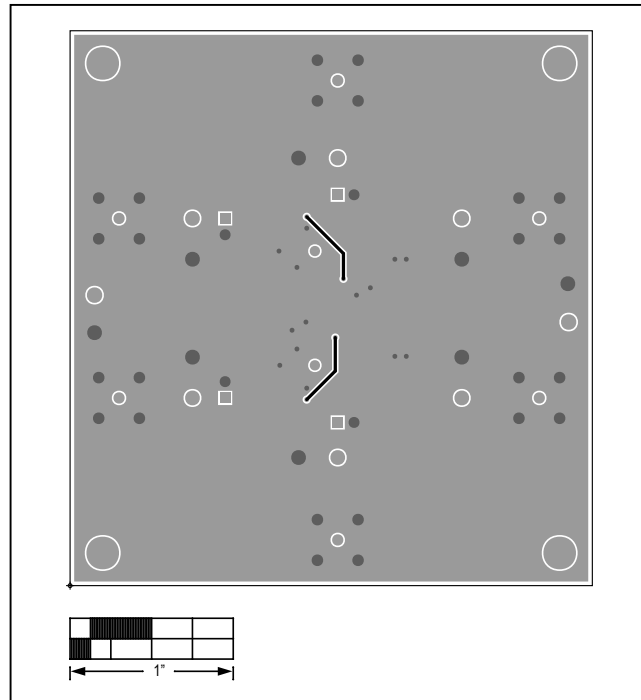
MAX44292 EV Kit PCB Layout—Component Side
